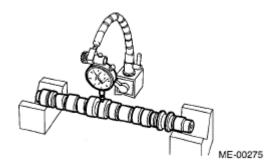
Measuring Camshaft Bend Courtesy of SUBARU OF AMERICA, INC.
